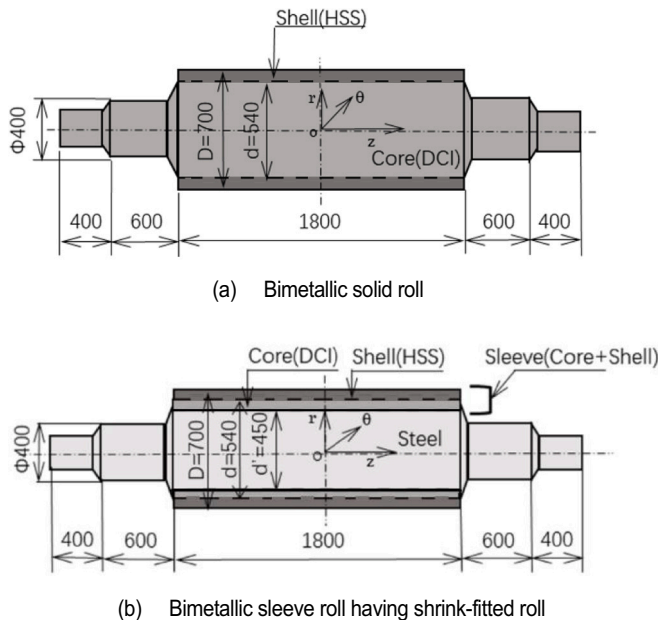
Solid roll and sleeve roll dimensions (mm).
